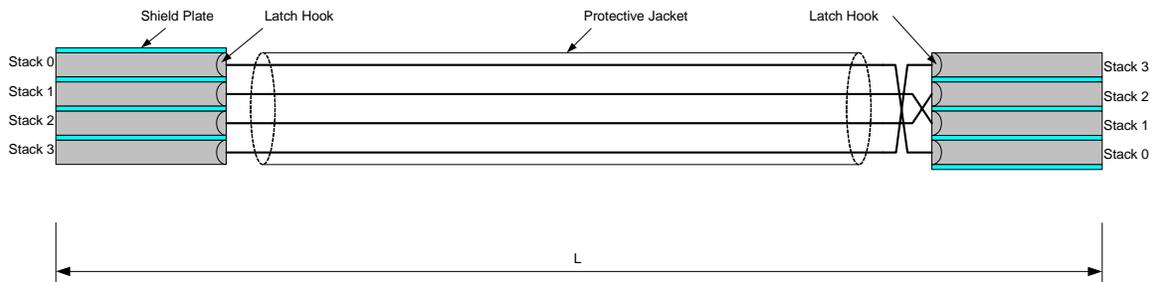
2 Side view of the “Short” HM Gbps cable assembly (i.e. viewed from the side of the latch hook).
